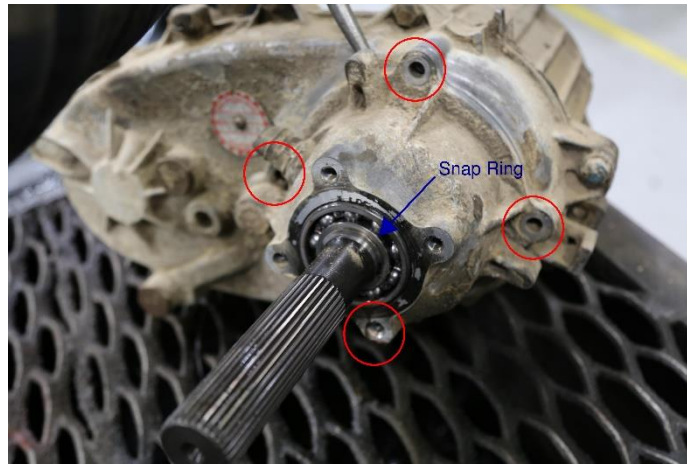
Rear Output Shaft Snap Ring and Shorter Housing
